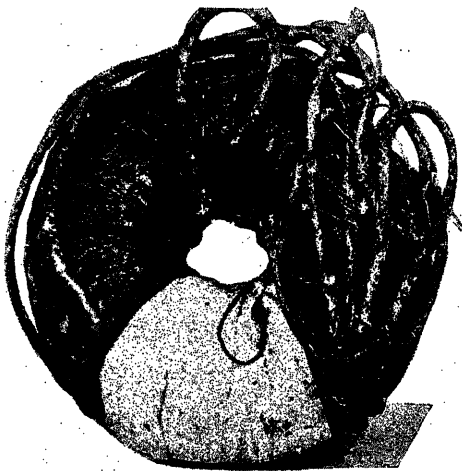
LOADING COIL WITH WINDING COMPLETED
